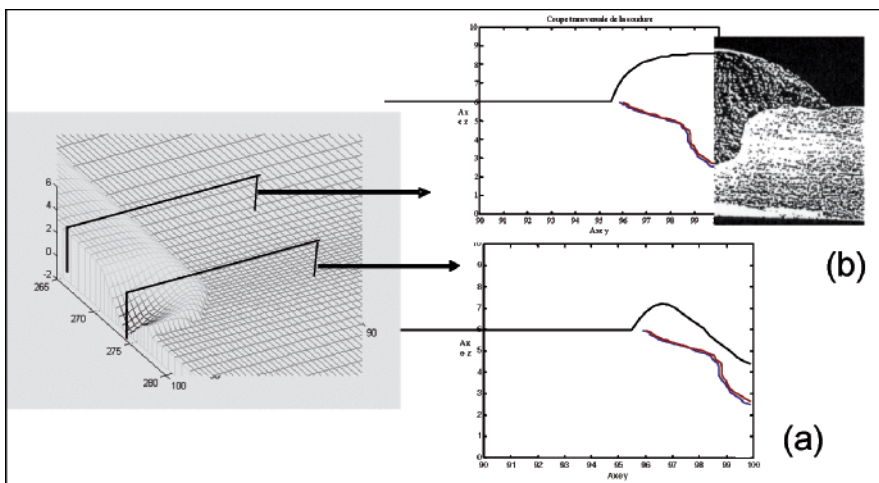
Prediction of the weld shape in the weld pool (a) and after solidification (b).
